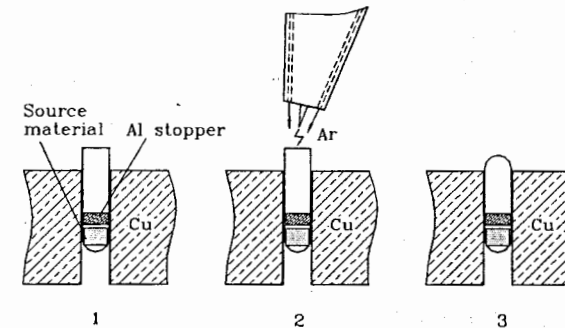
Scheme of the source container hermetization by electrical welding
